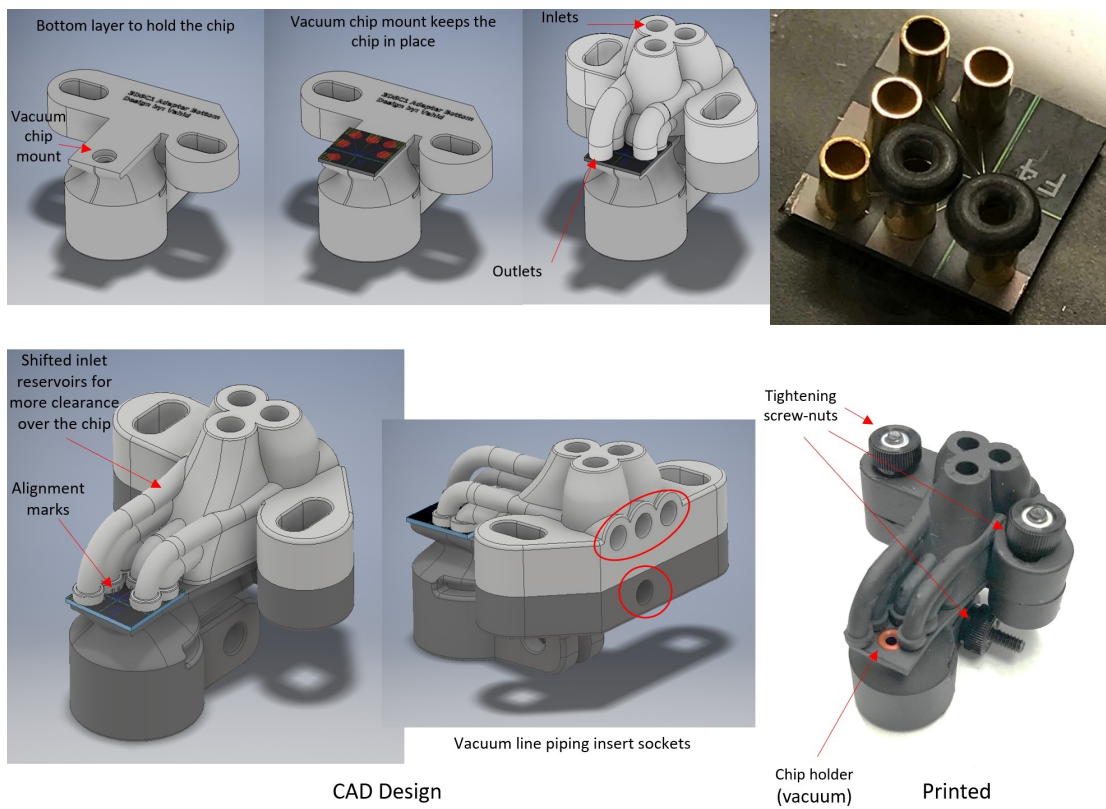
Custom-designed 3D printed chip mount for 3DHDF chips provides sealed access to 6 inlet/outlet channels. Autodesk’s Inventor software was used to draft the 3D model and the part was printed using the Formlabs SLA 3D printer available at UCSC BELS. The bottom row shows the revised design with a bigger clearance for the top-down imaging microscope objective.
